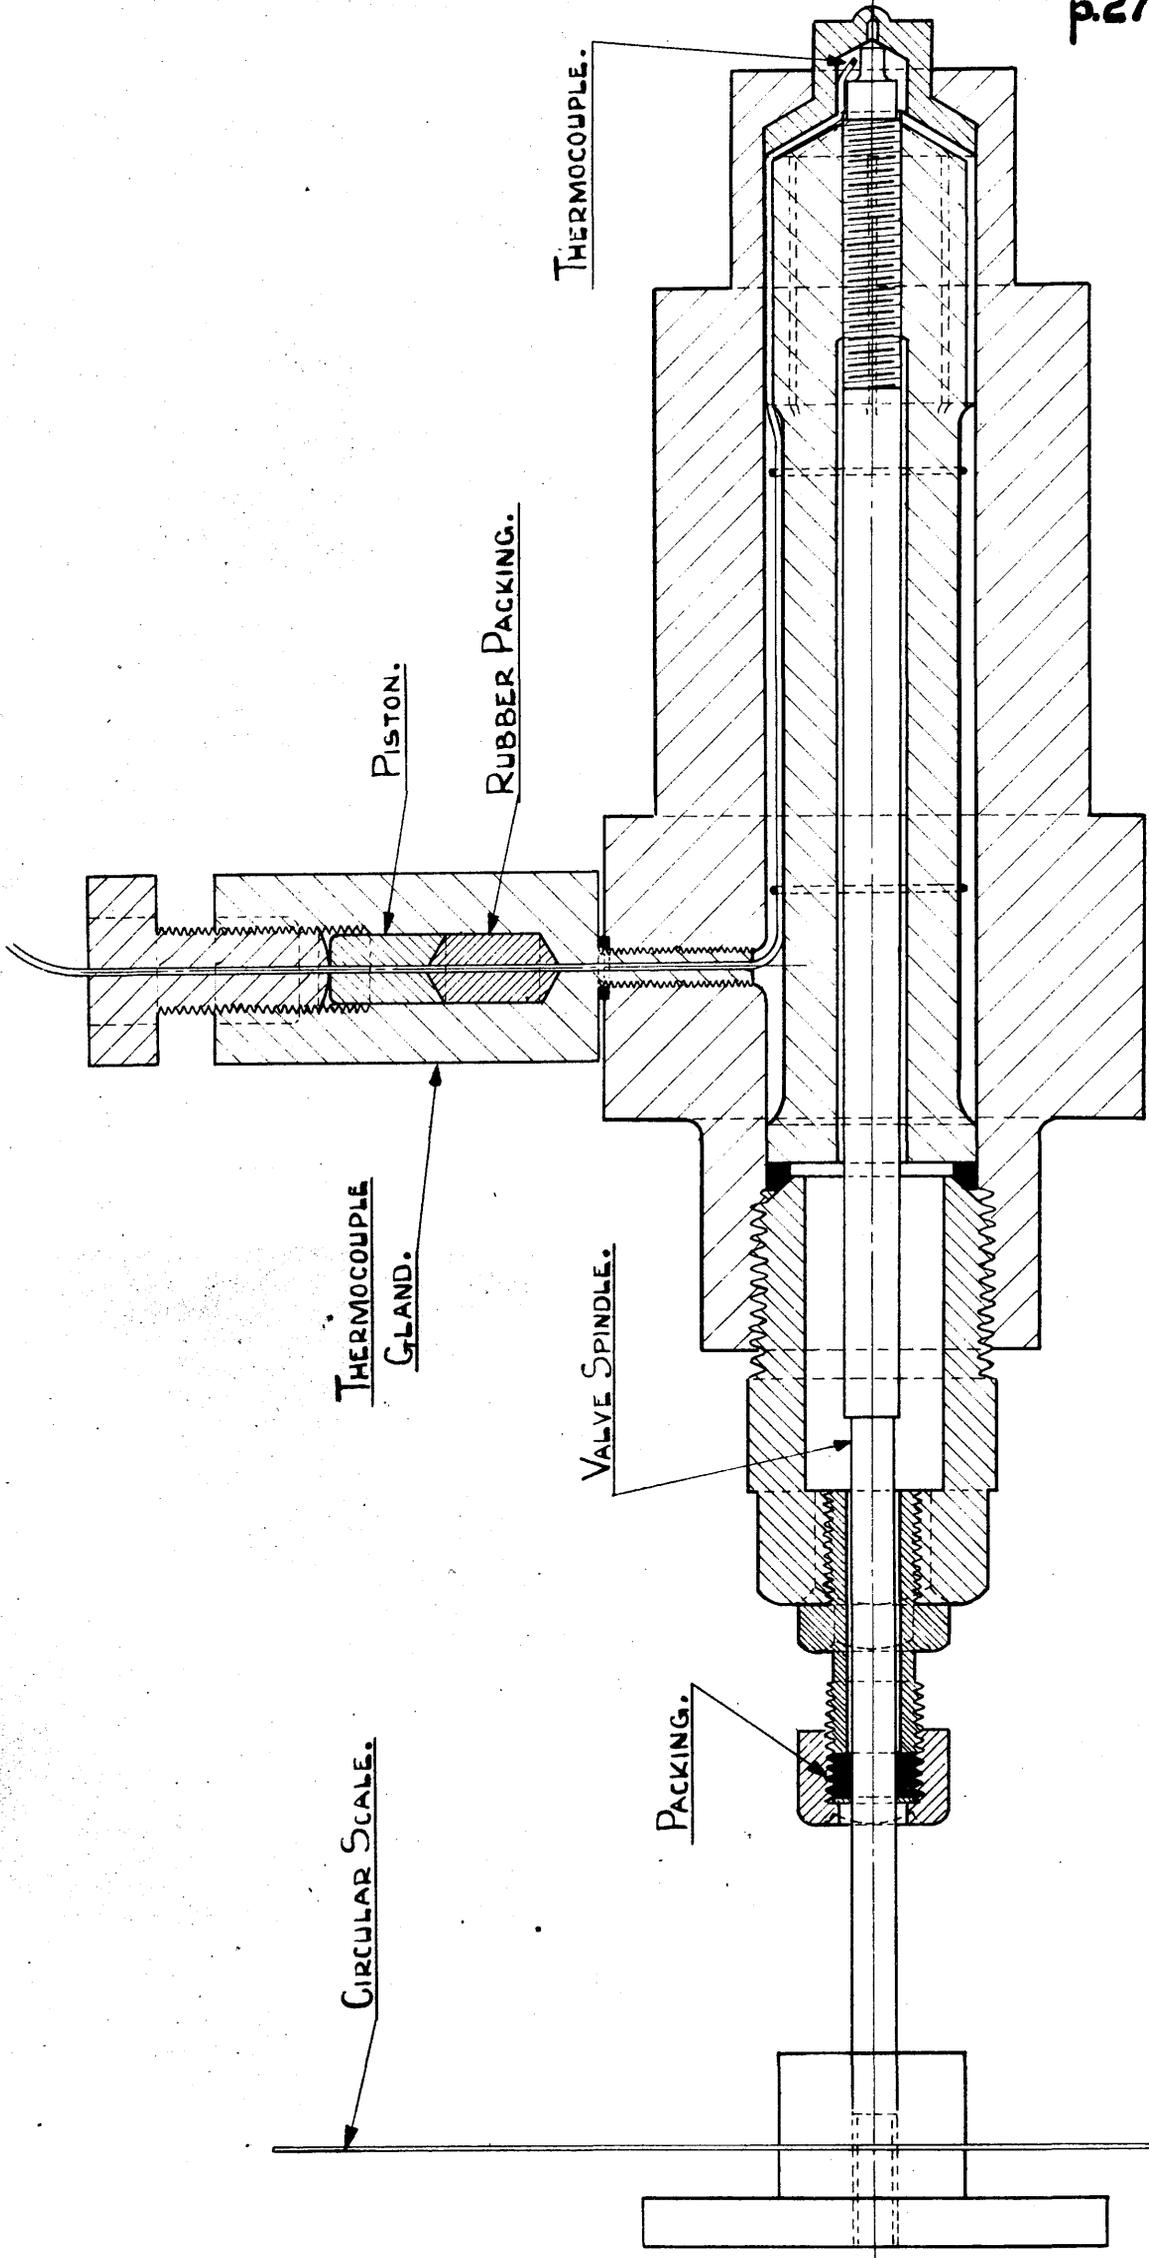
FUEL-VALVE-SPINDLE LIFT ADJUSTMENT, AND THERMOCOUPLE. (FULL SIZE)
